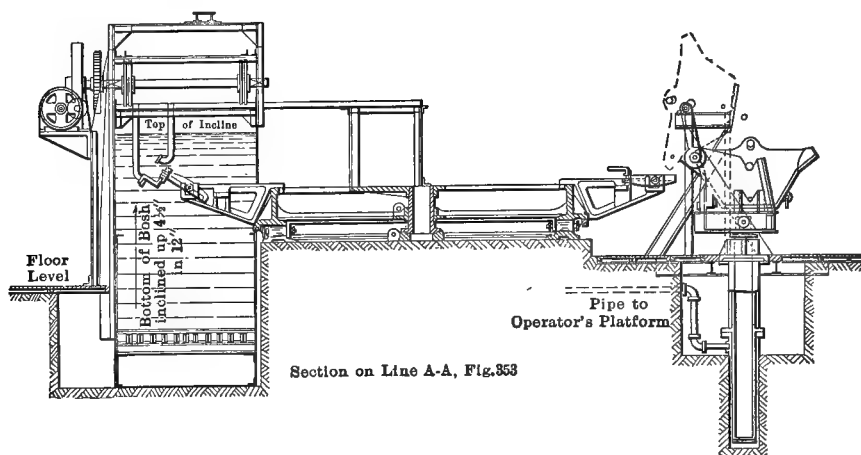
Klepinger copper-casting machine, Great Falls, Mont.
